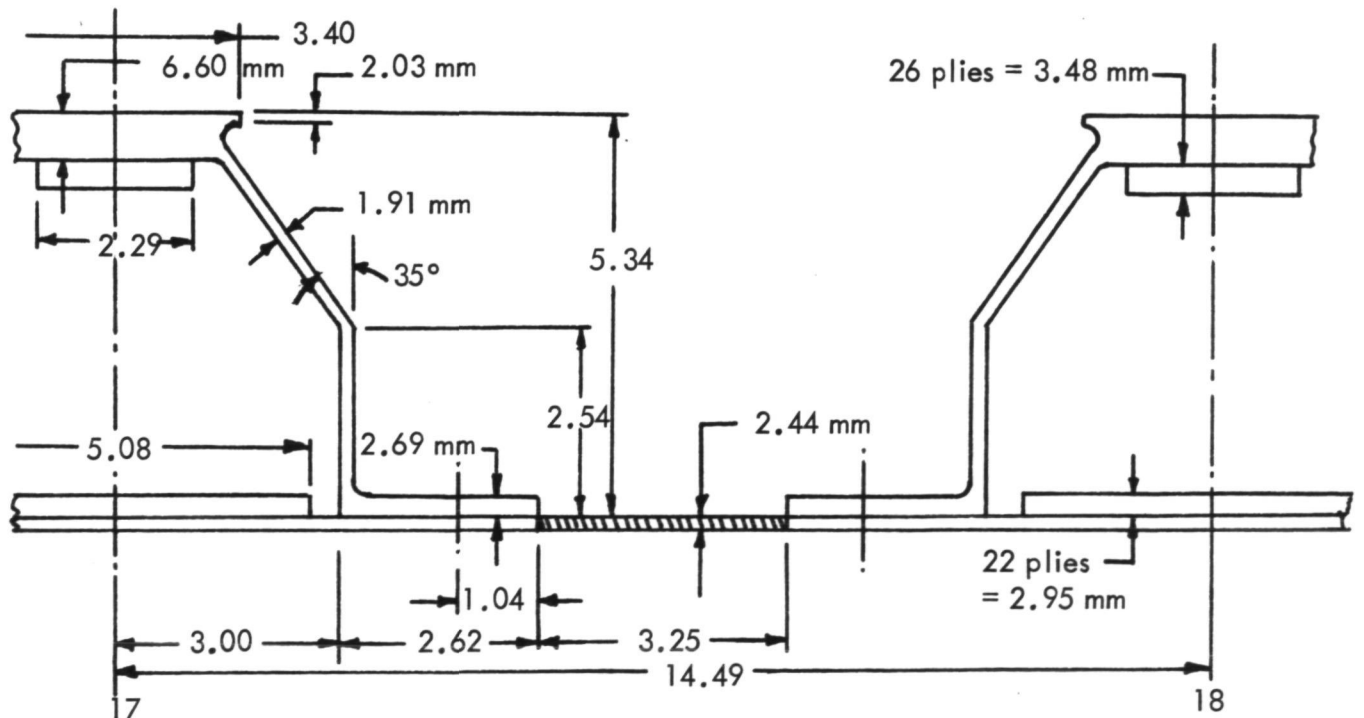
W.S. 180 LOWER SURFACE CRACK
